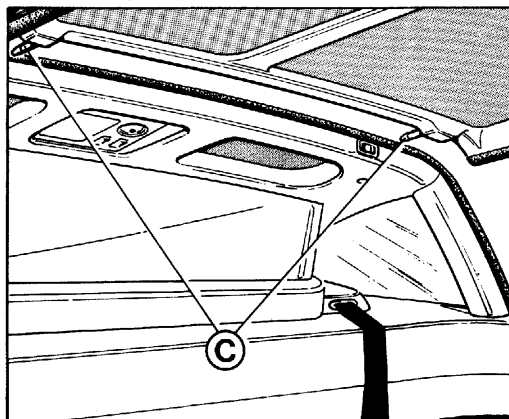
26 - 27 - Hardtop (removal and mounting)
